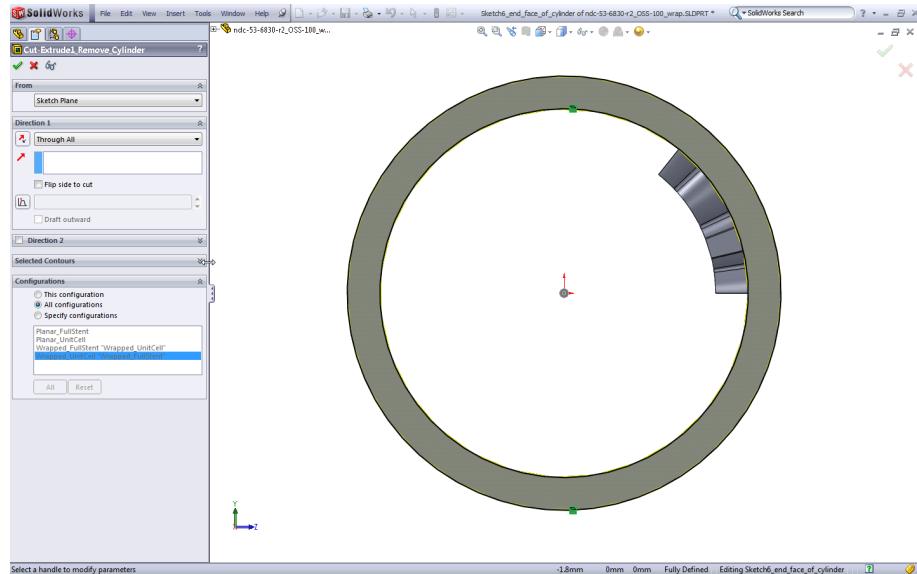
The cylinder is stripped away from the unit cell using a cut feature.
